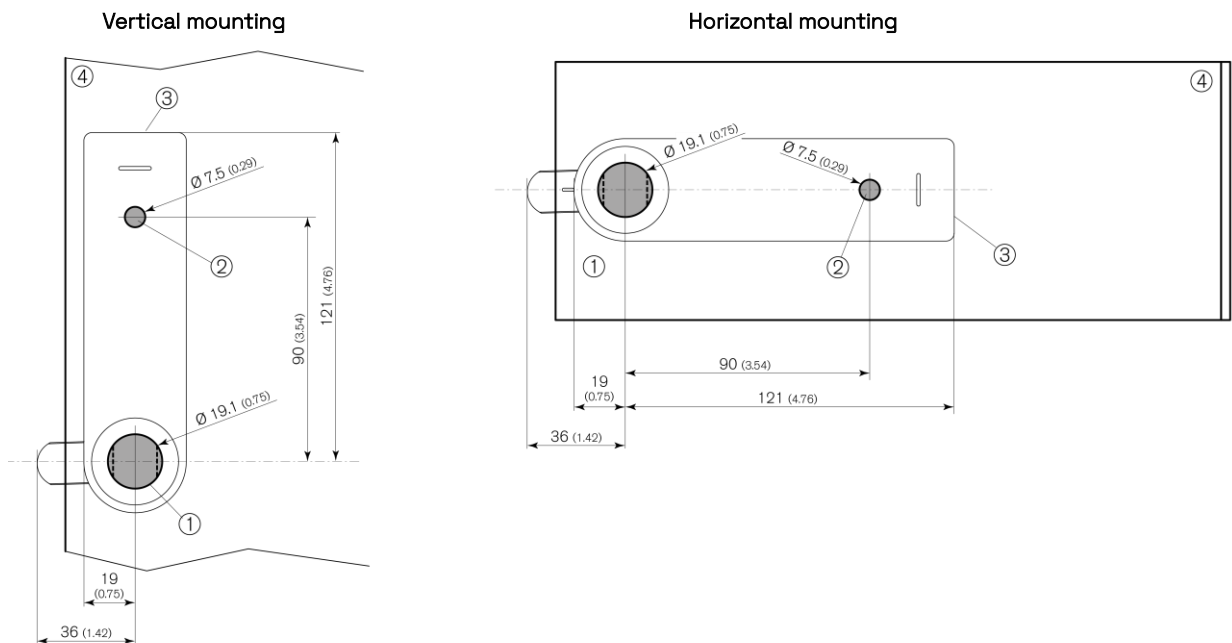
Mounting holes in the door (measurements for standard latch shown)
